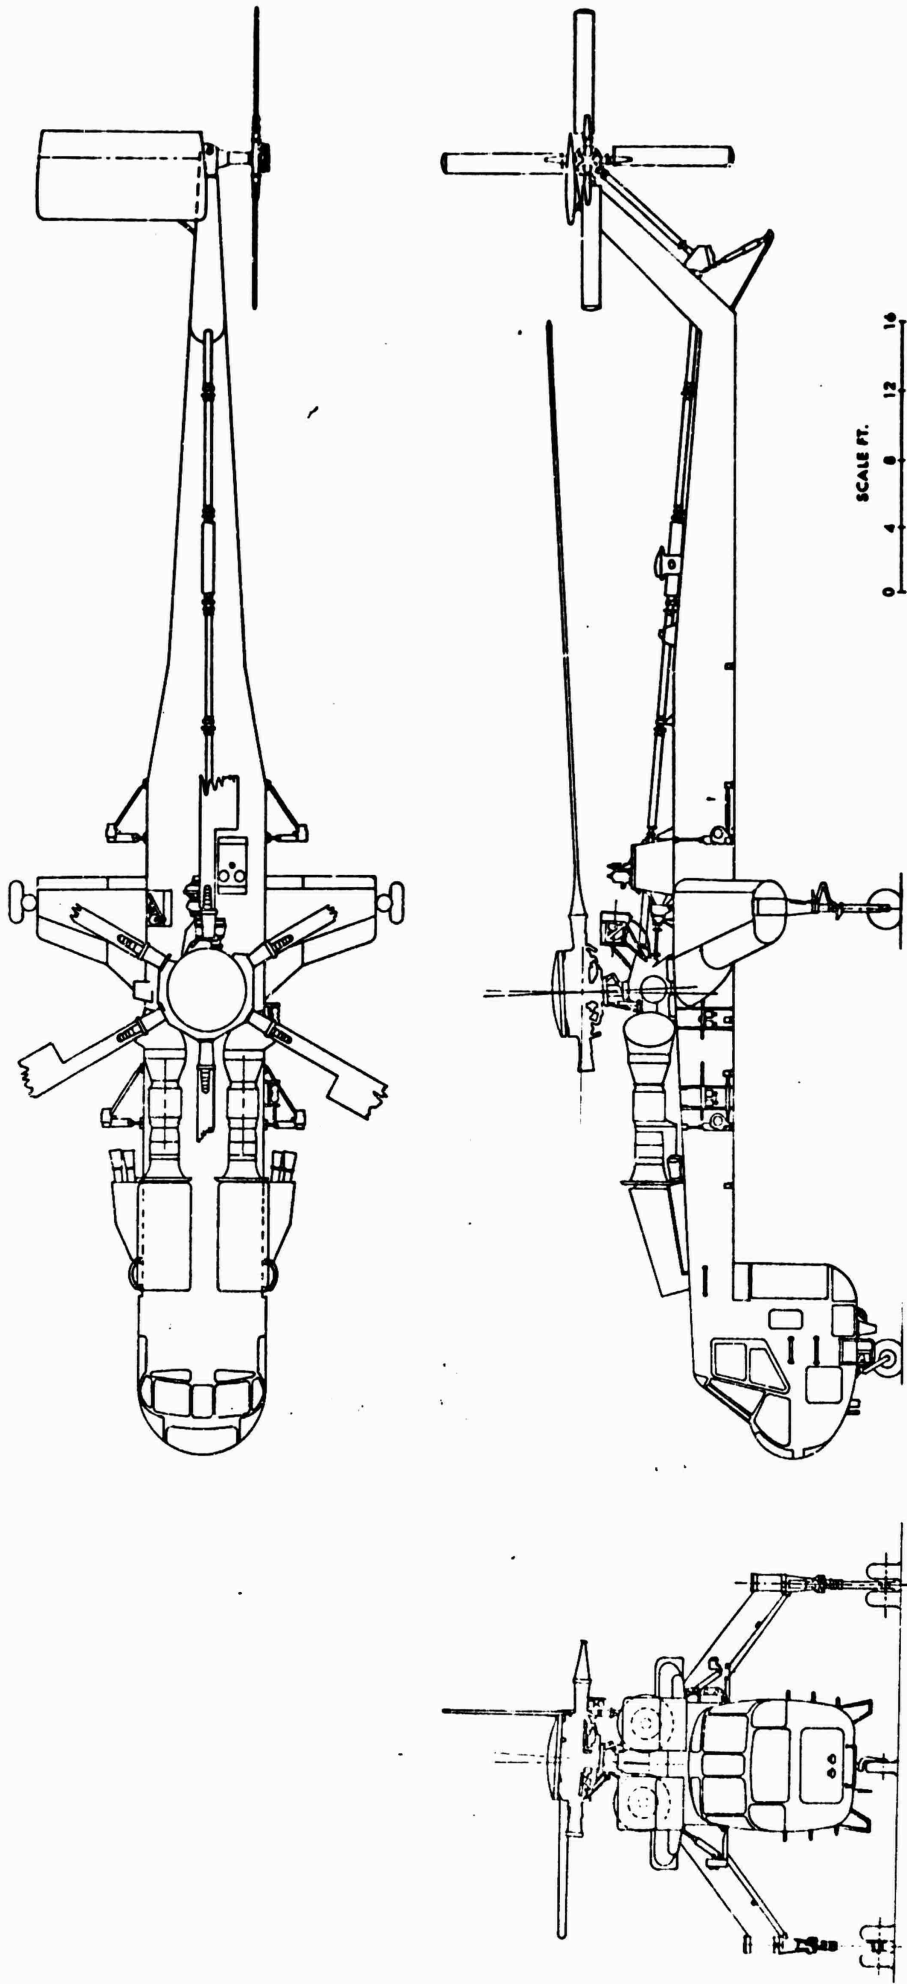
U.S. Army CH-54B Alccraft, Three-View Drawing.
